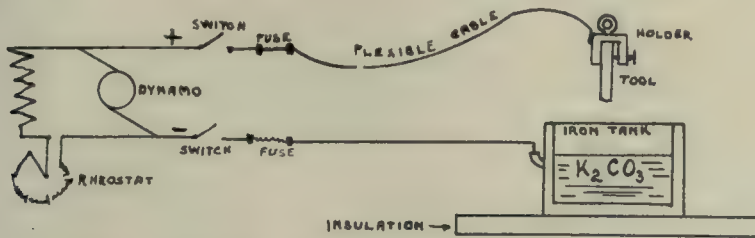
Arrangement of Iron Tank for Heating Tools Electrically.
